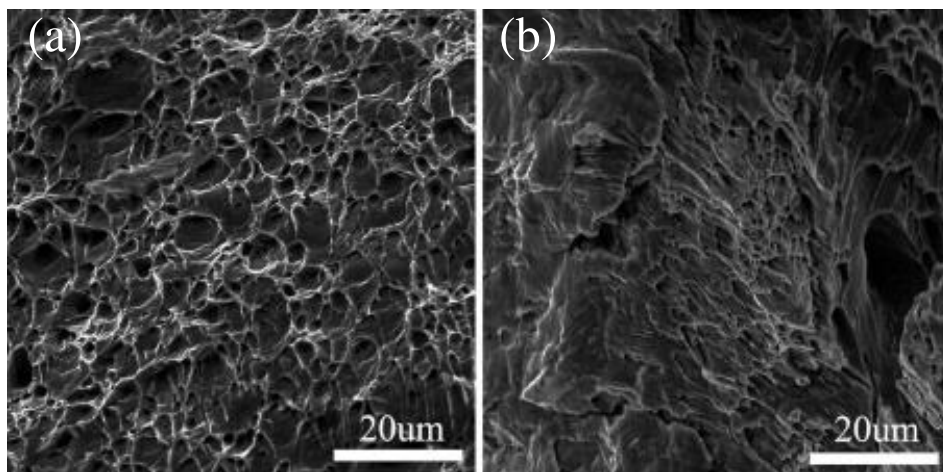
Fracture morphology of the TWBs: (a) base material, and (b) weld seam
